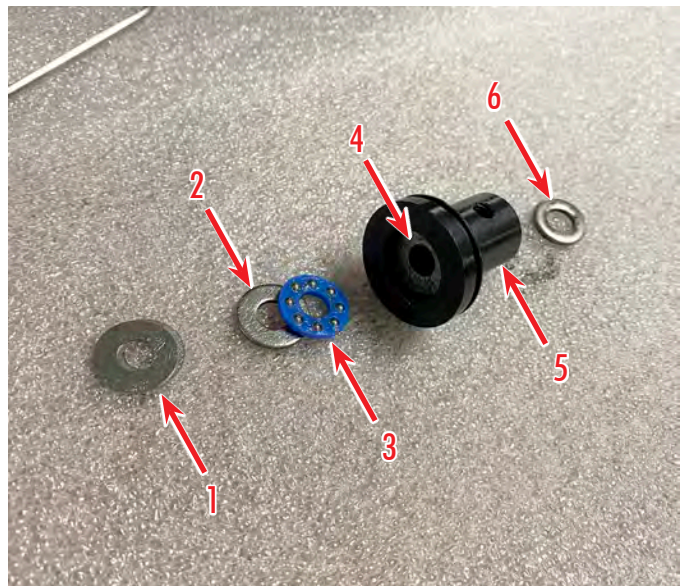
(1) Shim washers, (2) top thrust bearing washer, (3) thrust bearing, (4) bottom thrust bearing washer (still in the leadscrew support), (5) column thrust, and (6) 1/4" washer.
